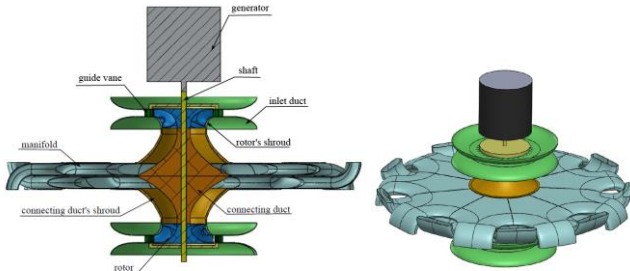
Schematic (left) and isometric (right) view of the self-rectifying twin-rotor radial flow air turbine.
